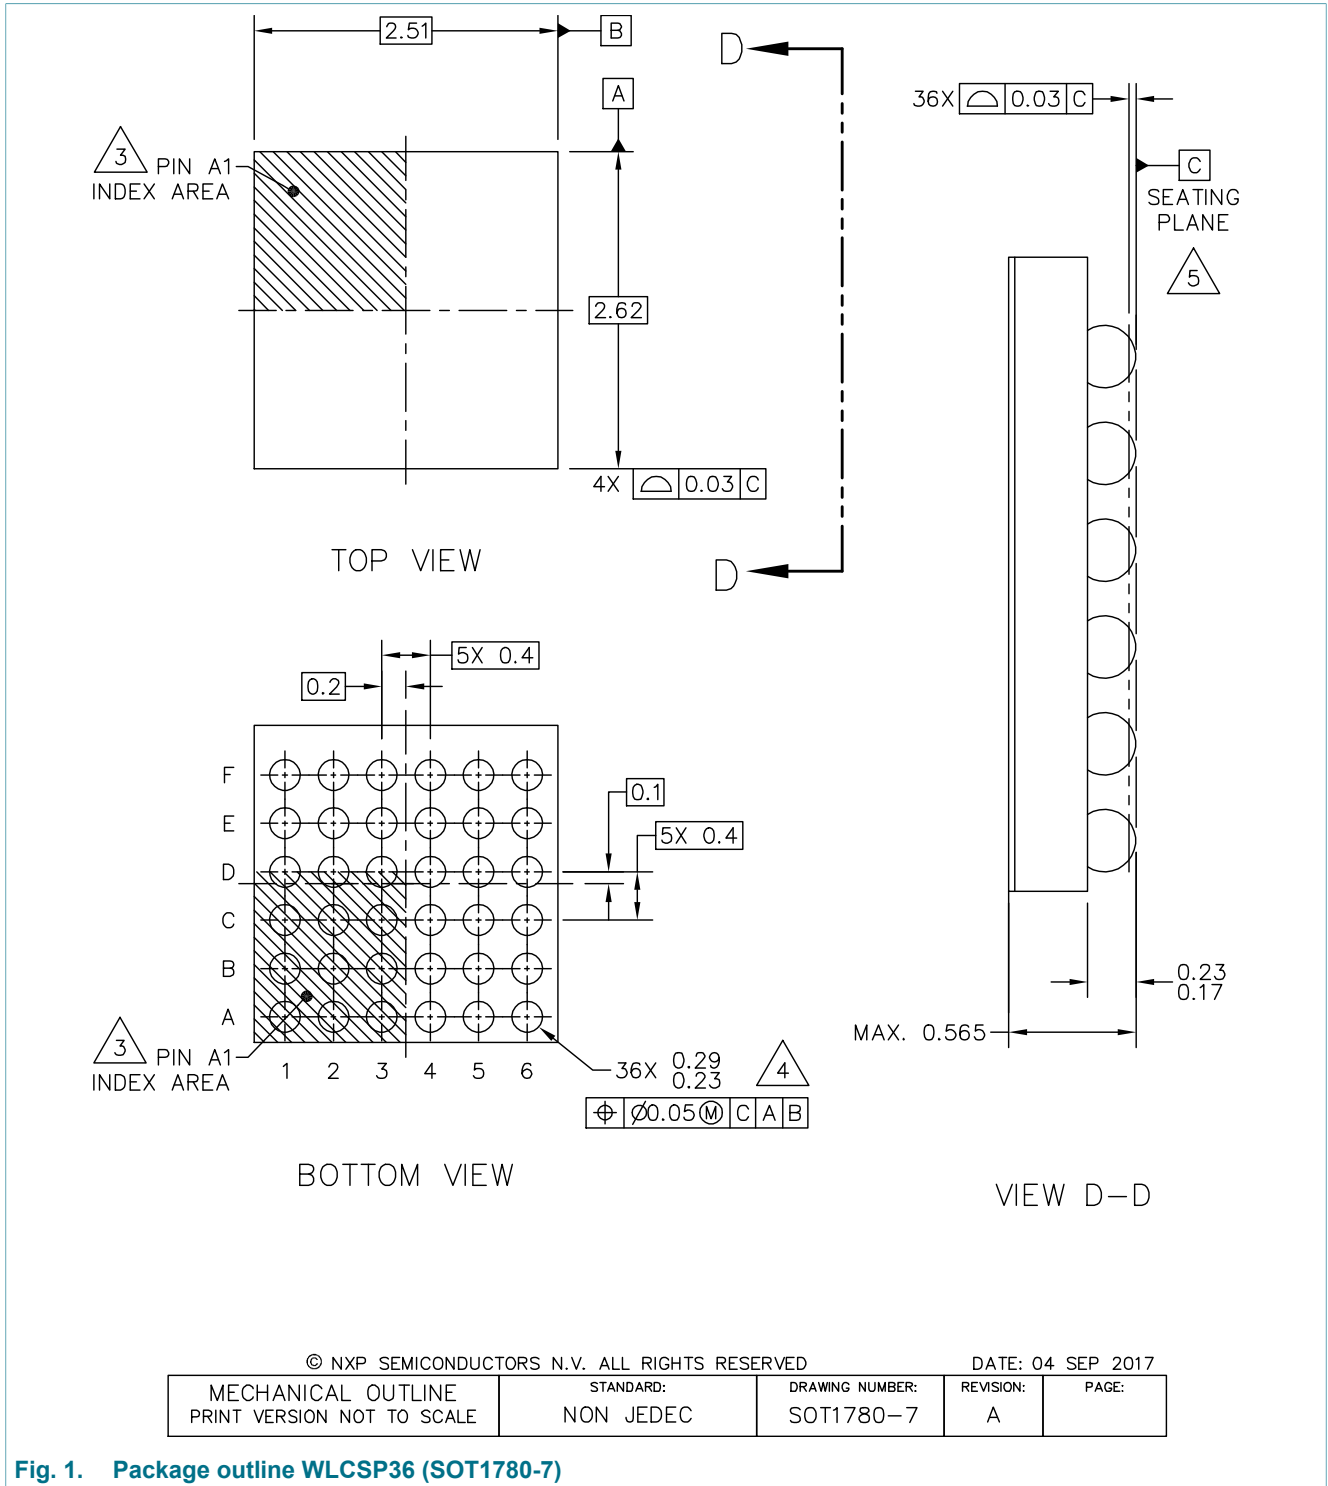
Package outline WLCSP36 (SOT1780-7)
